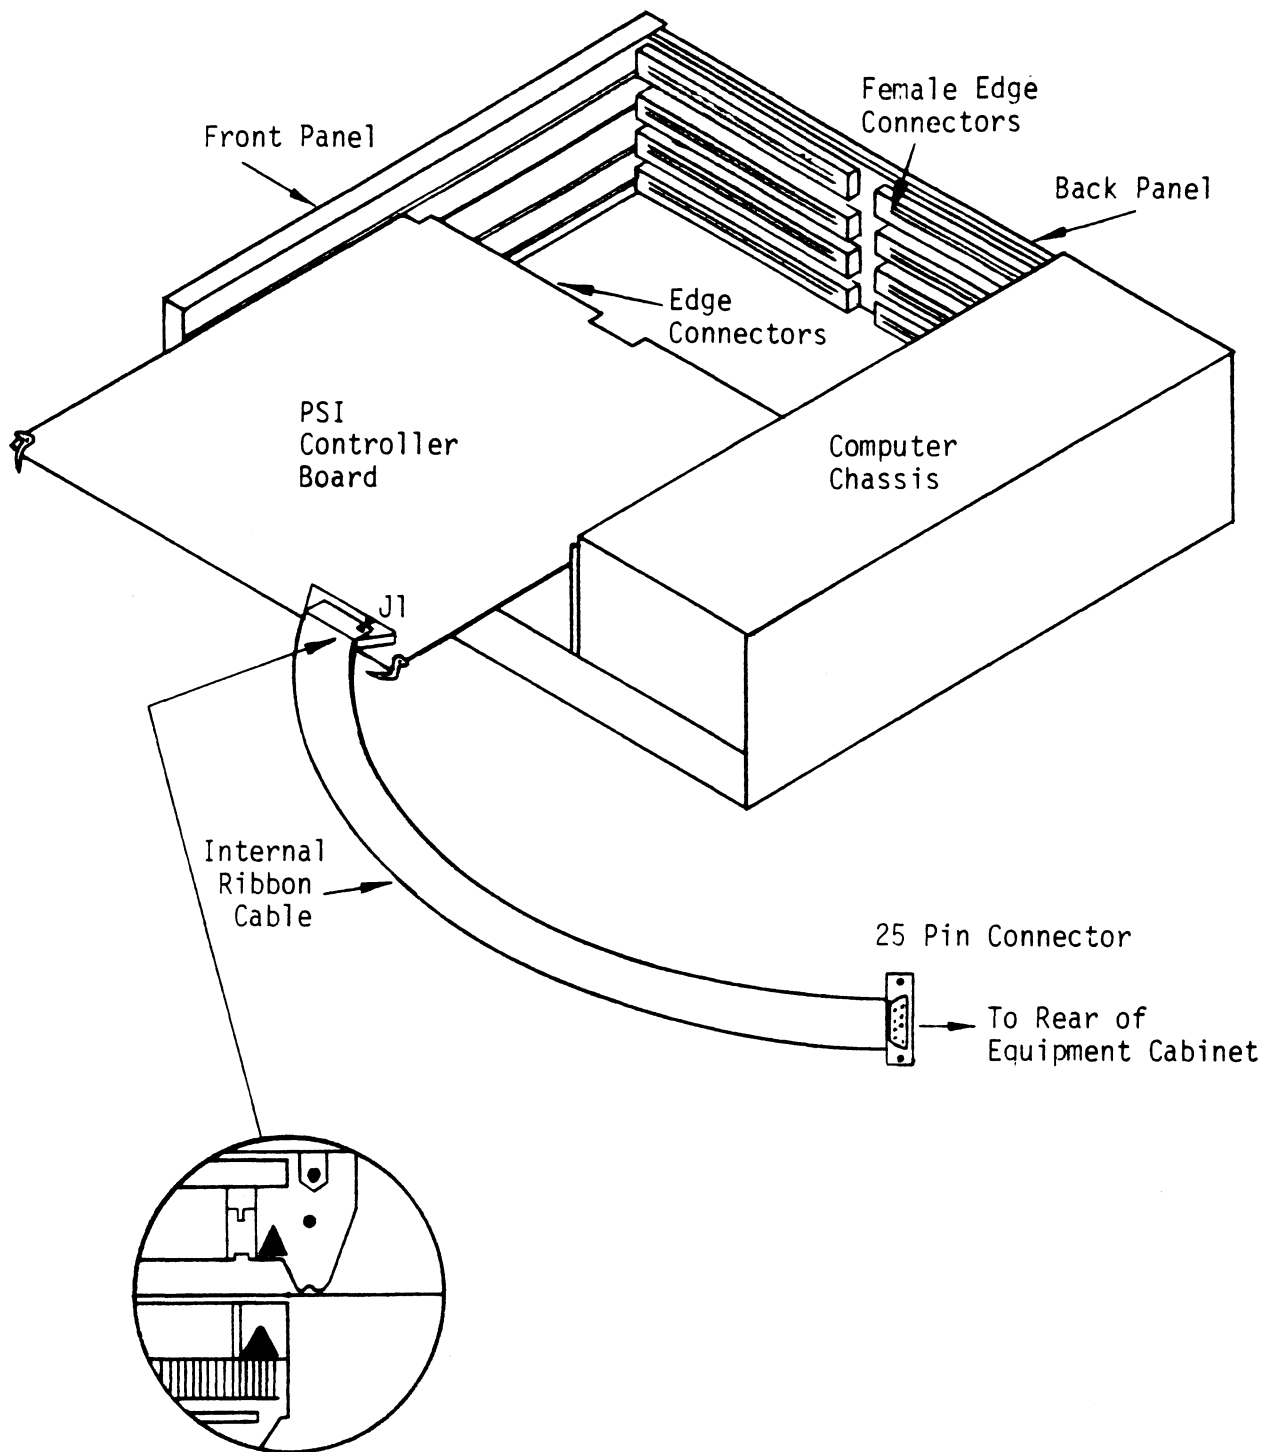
BOARD AND CABLE INSTALLATION
